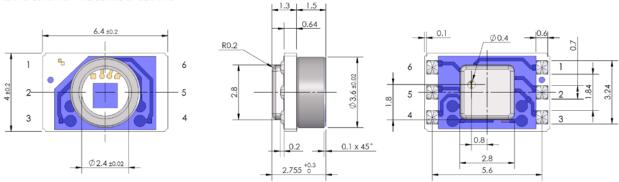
Pin configuration and package outlines, recommended PCB footprint
